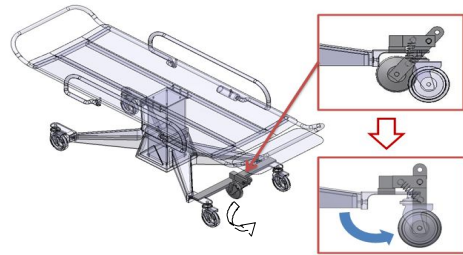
Design Concept of Shower Carrier equipped with Drive-assisting System
